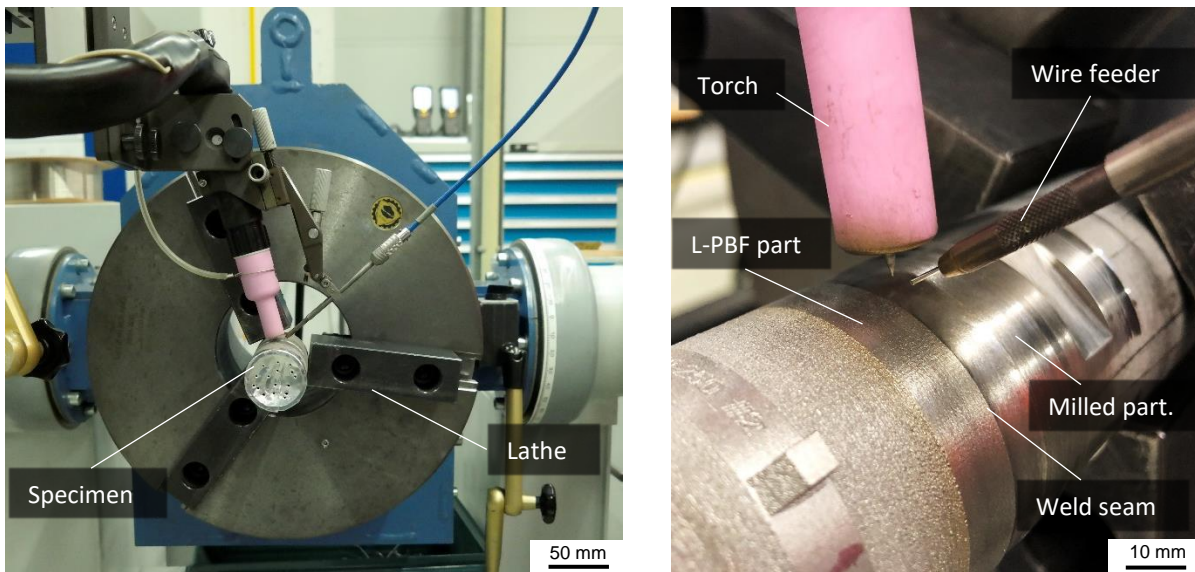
Polysoude orbital TIG welding station with (a) view of the welding lathe and (b) detailed view of the torch with the Tungsten electrode (left) and Thermanit 625 wire (right)
